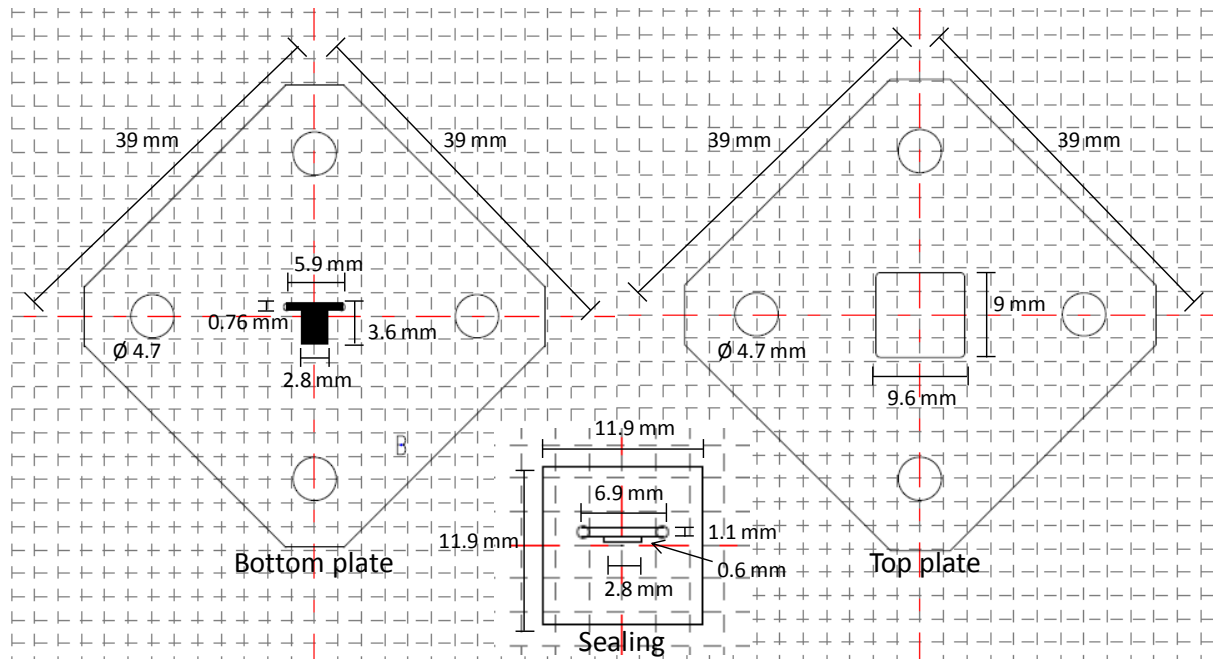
Dimensions of the bottom plate, top plate and sealing.
